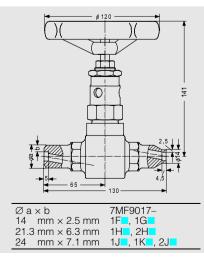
/113 Shut-off valves 7MF9017-, dimensions
